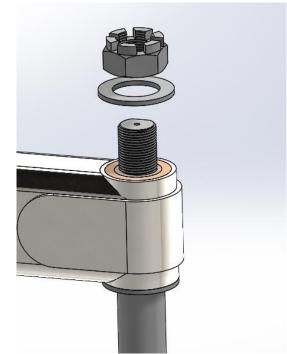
SolidWorks rendition of the spindle-hub assembly.
